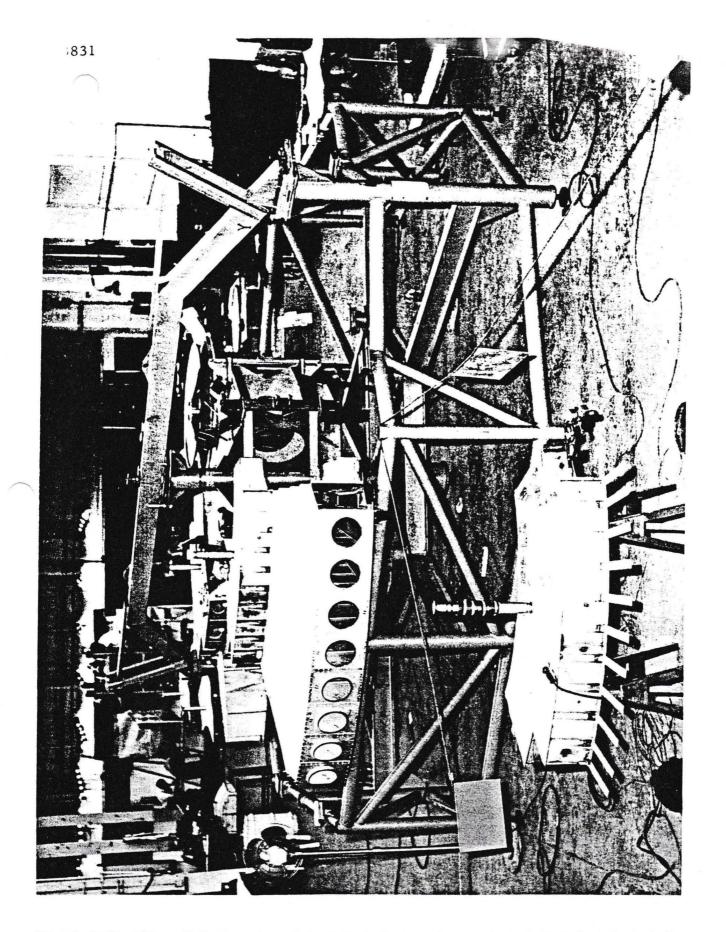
INNER WING ASSEMBLY- 60° AIRFRAME SEGMENT LOADED IN FINAL AIRFRAME ASSEMBLY JIG
